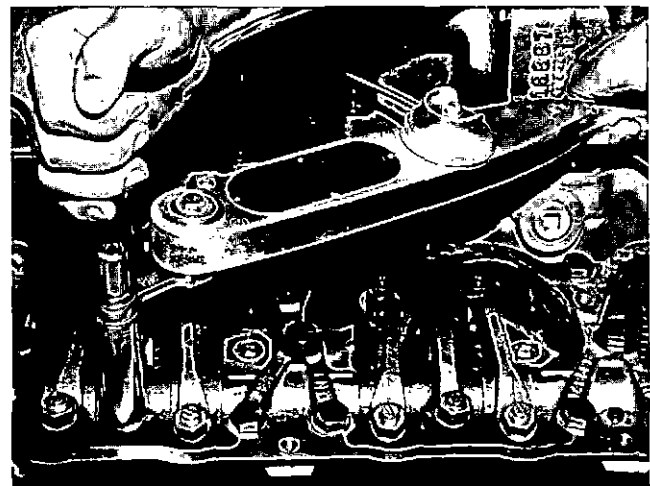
, V414201. Tightening injector adjusting screw locknut with ST-669
